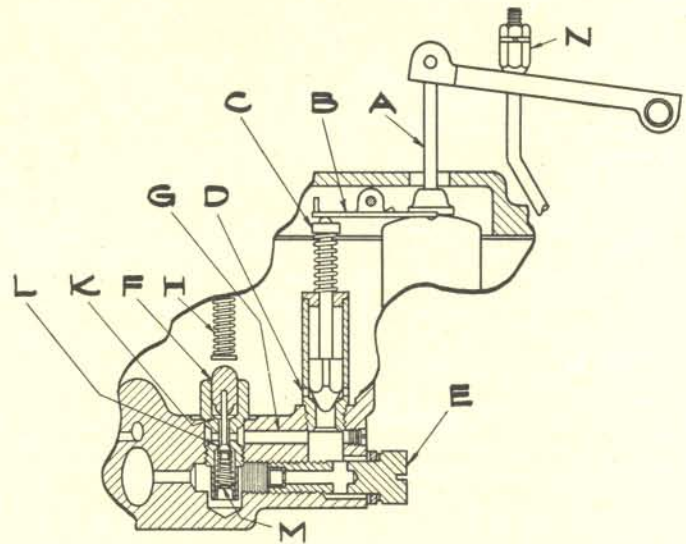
shows the carburetor in idling position, at which stage gas is delivered to the idle system through clearance "F" of the
